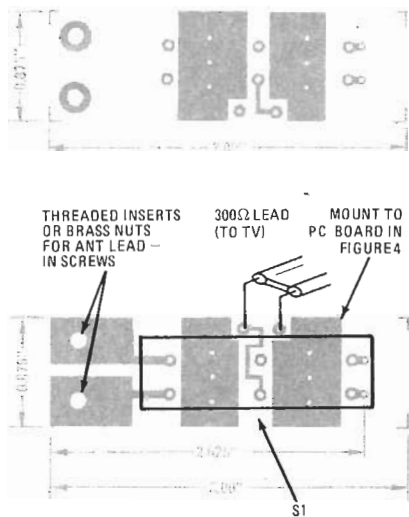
COMPONENT PLACEMENT diagram of switch PC board.
